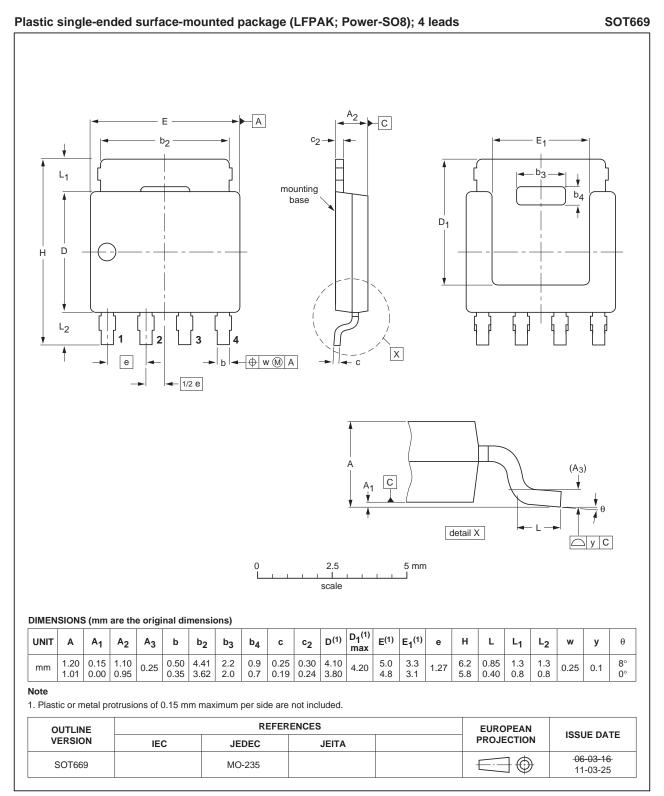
Package outline SOT669 (LFPAK; Power-SO8)
